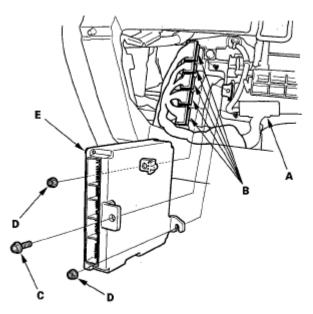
Identifying ECM/PCM And Wire Harness Connector Courtesy of AMERICAN HONDA MOTOR CO., INC.
